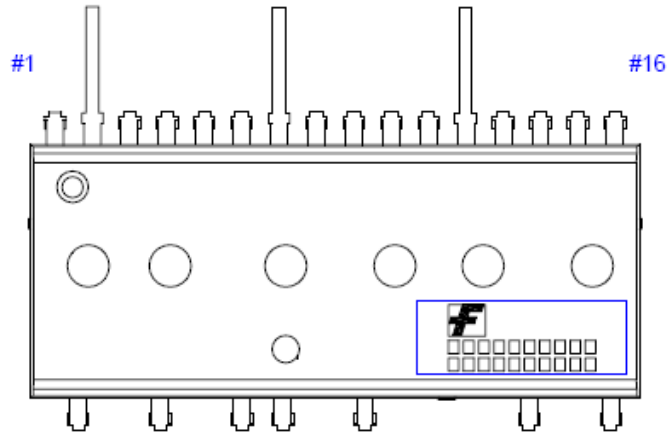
Marking layout of Package SPM23-AC type (bottom side)
